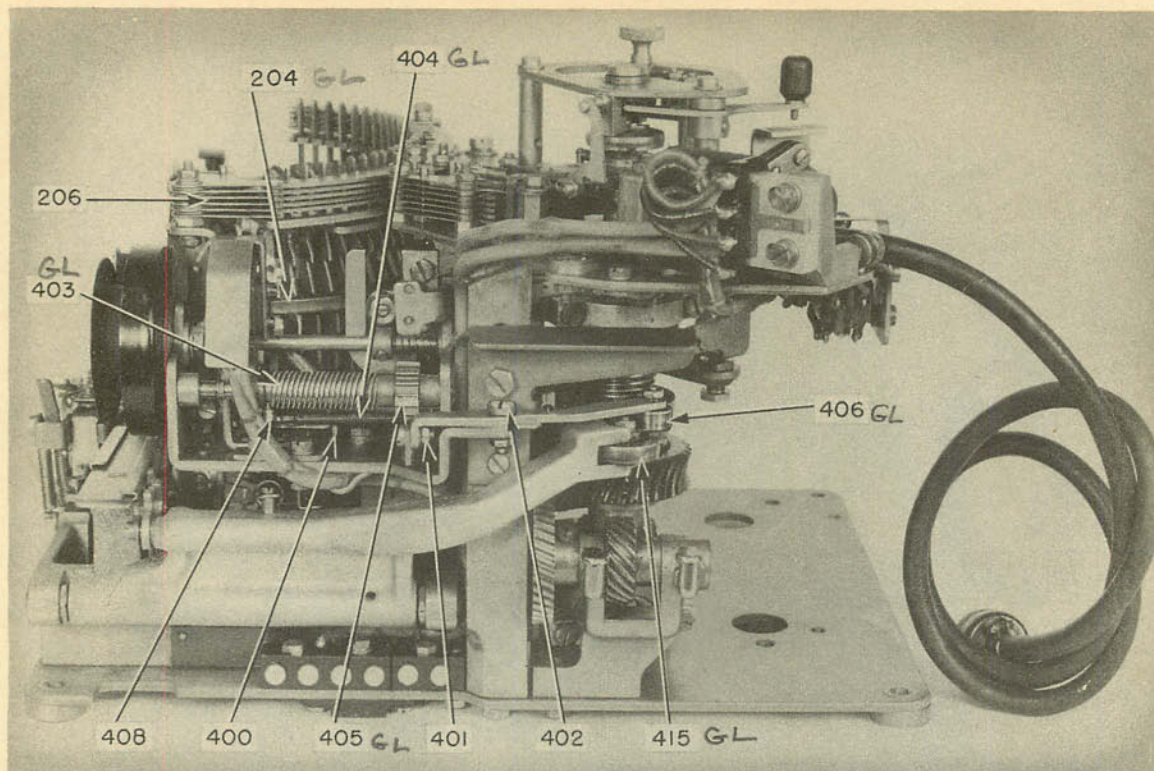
Lubrication points, backspace and tape feed-out mechanism.
